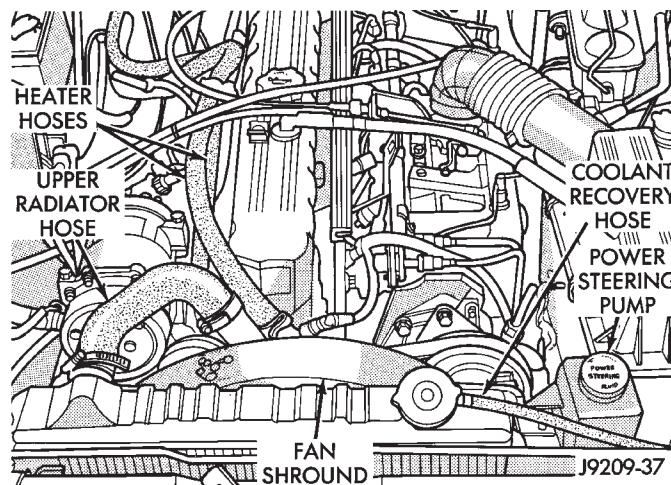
Upper Radiator Hose, Coolant Recovery Hose, Fan Shroud & Power Steering Pump
